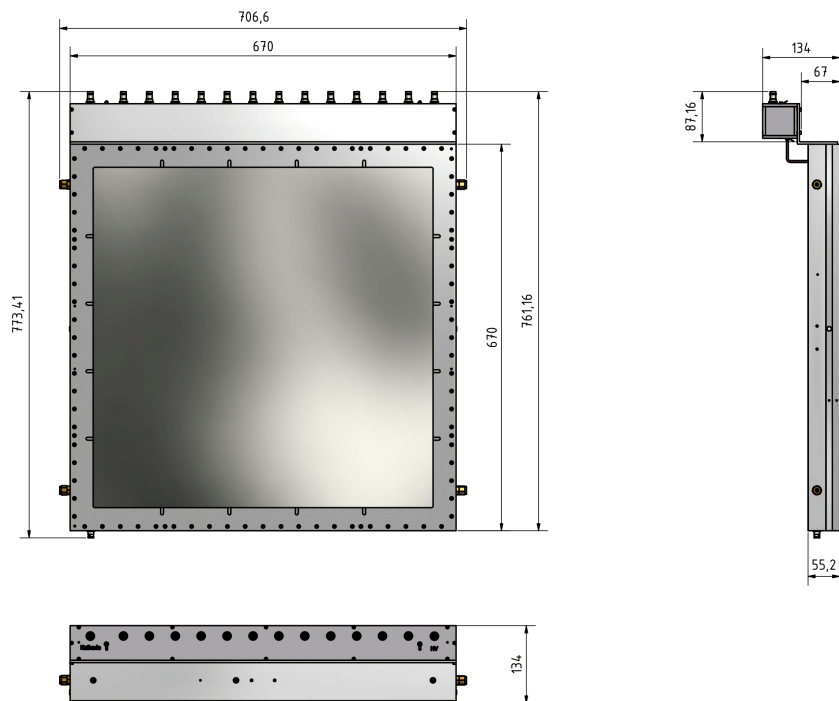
Drawing of the full size prototype with the 13 HV channels.
